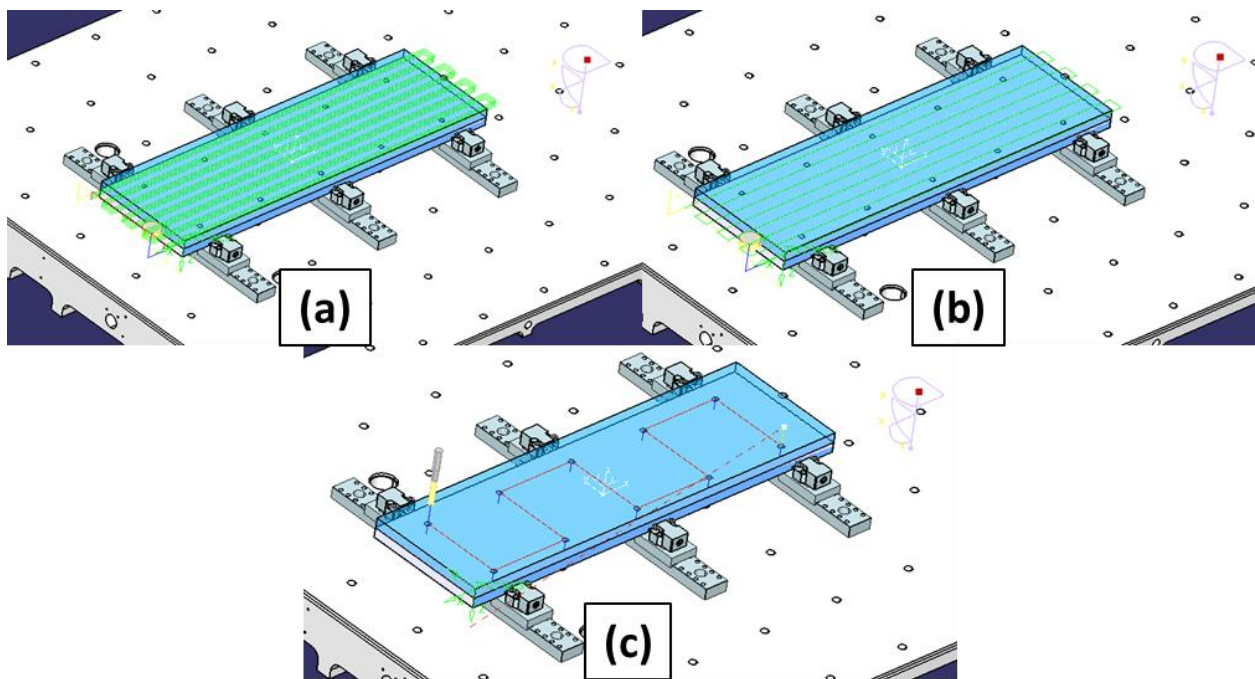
Stage 1 machining of distortion demonstrator component; (a) rough face milling; (b) finish face milling; and (c) drilling stage 2 bolt holes
